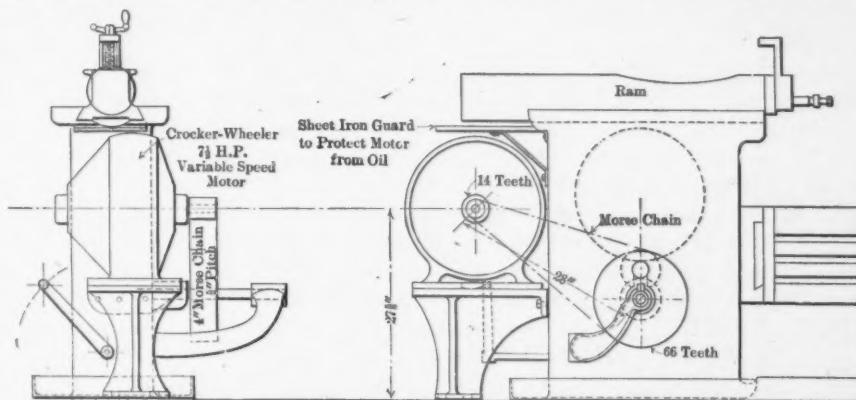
THE ARRANGEMENT OF MOTOR DRIVING USED UPON THE 24-IN. GOULD & EBERHARDT CRANK SHAPER.—7½ H.P. CROCKER-WHEELER MOTOR.
